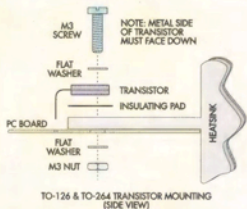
the mounting details for the TO-126 (Q7) and TO-264 (Q10-Q17) transistors. Don't solder the leads until the screws have been tightened to their final torque.
